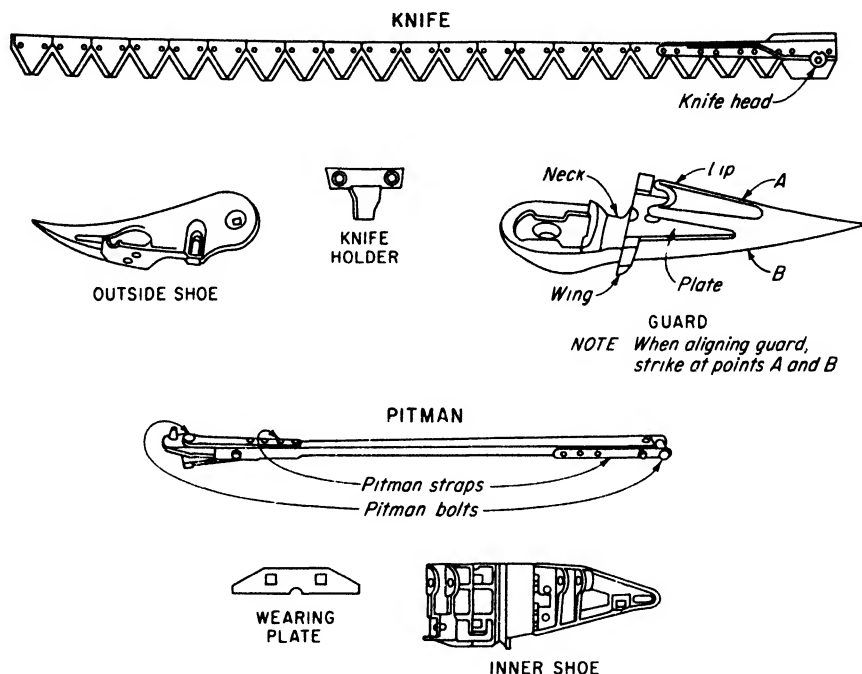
Various parts of a cutter bar with knife and pitman.
